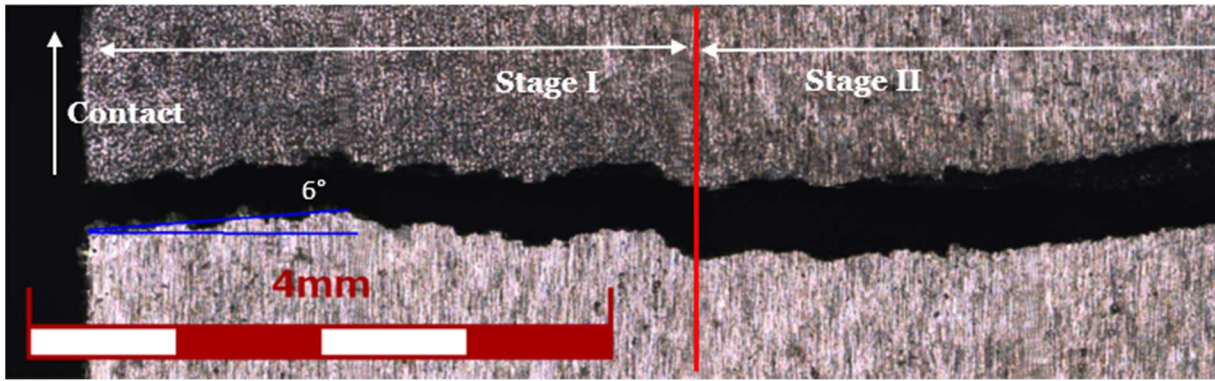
Angle of the crack initiation and profile of the crack propagation for the specimen under the contact of the cylinder pad with radius  $R=50\text{mm}$ .
